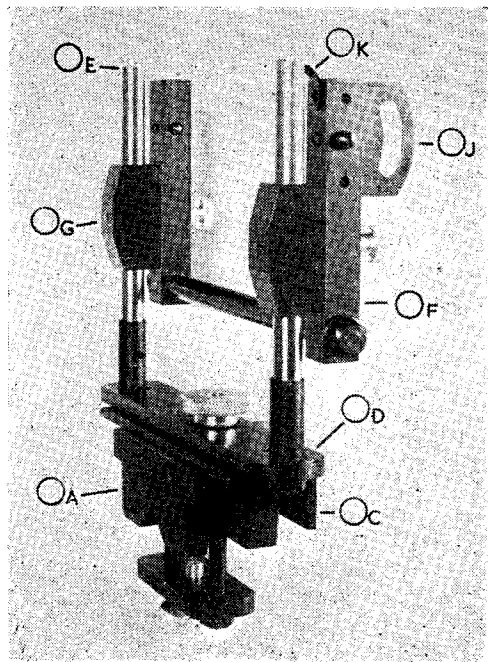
The front slide assembly. "Oa"—V-block; "Oc"—cross-slide; "Od"—fork base; "Oe"—fork upright; "Of"—vertical slide side-member; "Og"—slide bearing blocks; "Oj"—quadrant plate; "Ok"—index
